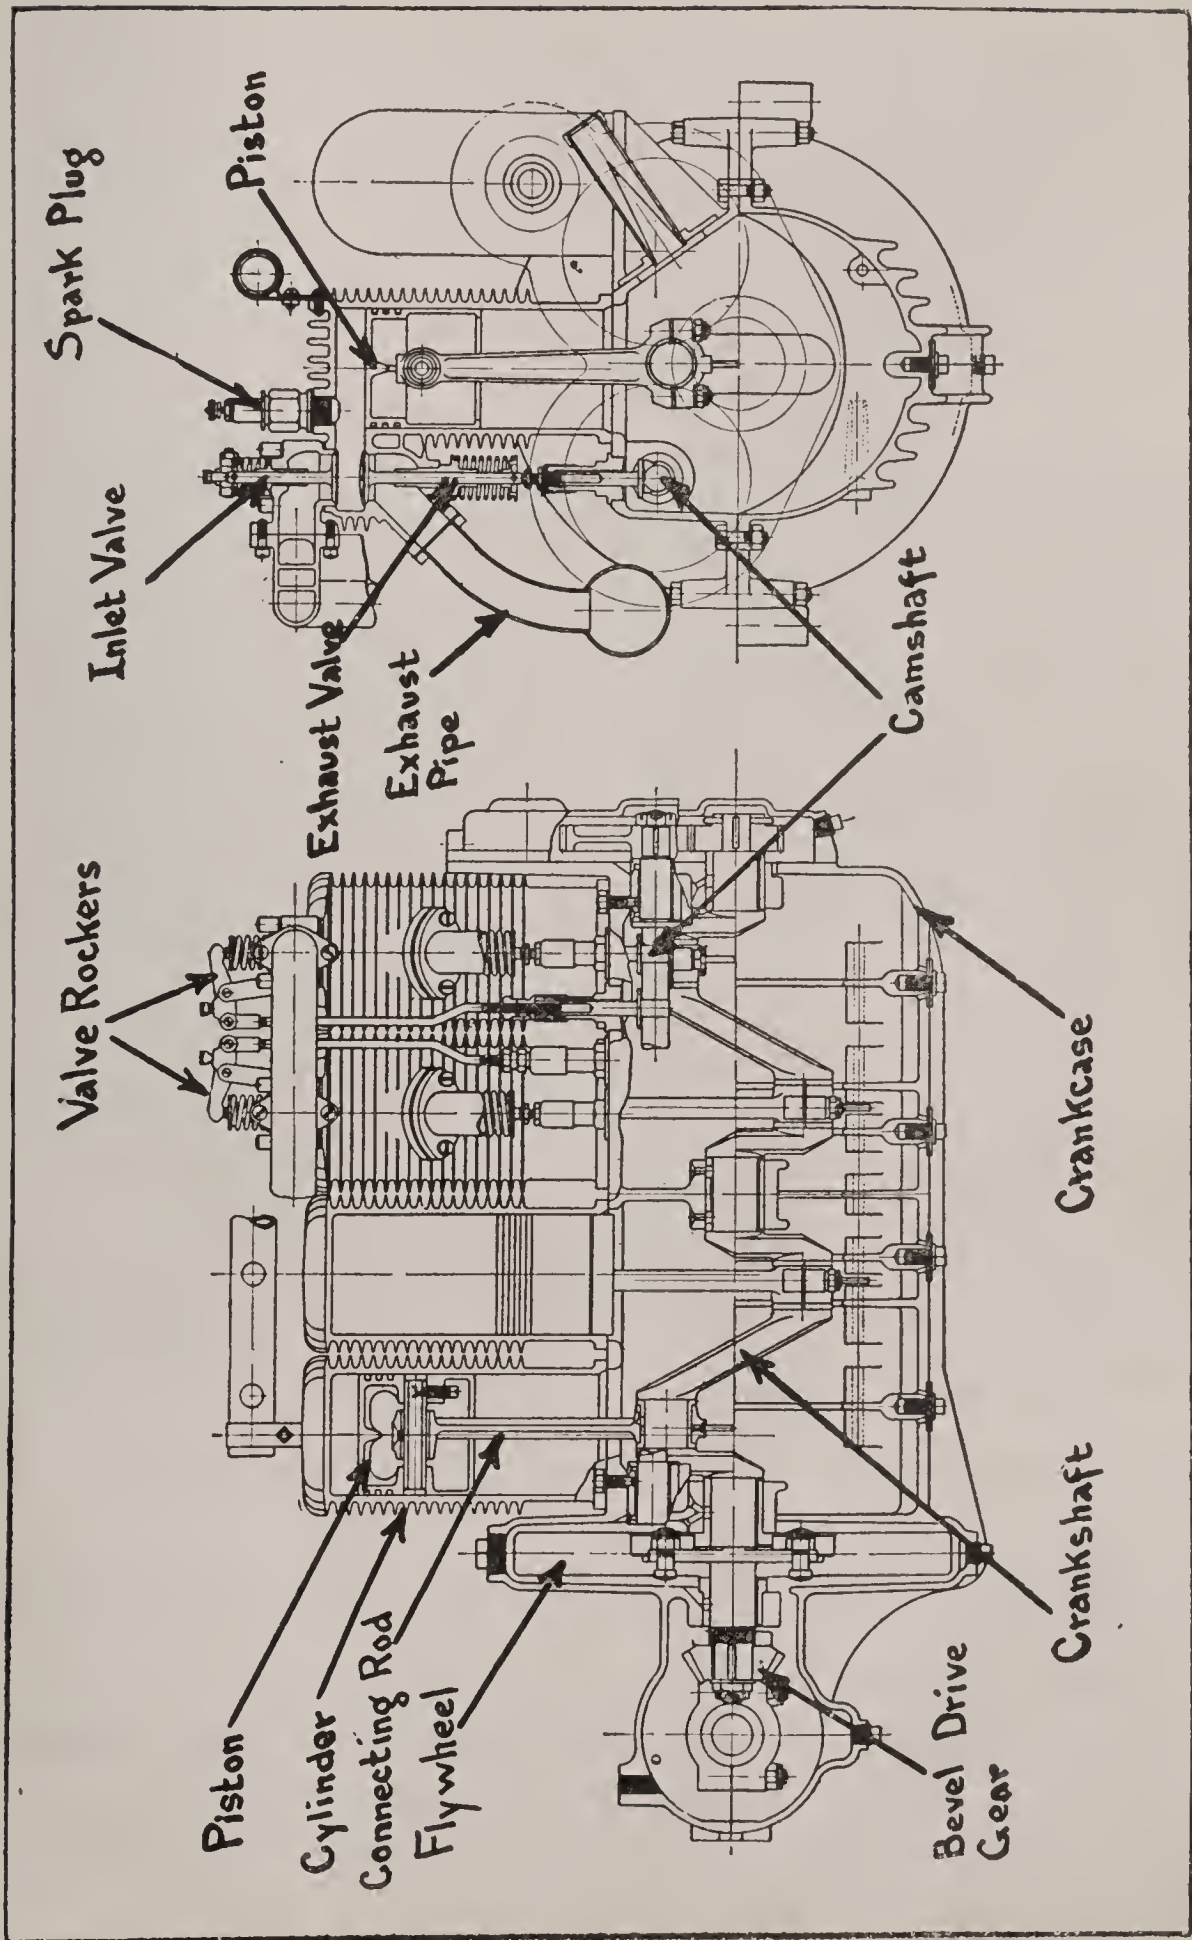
Sectional Views Defining Internal Construction of Henderson Four Cylinder Motorcycle Power Plant.
